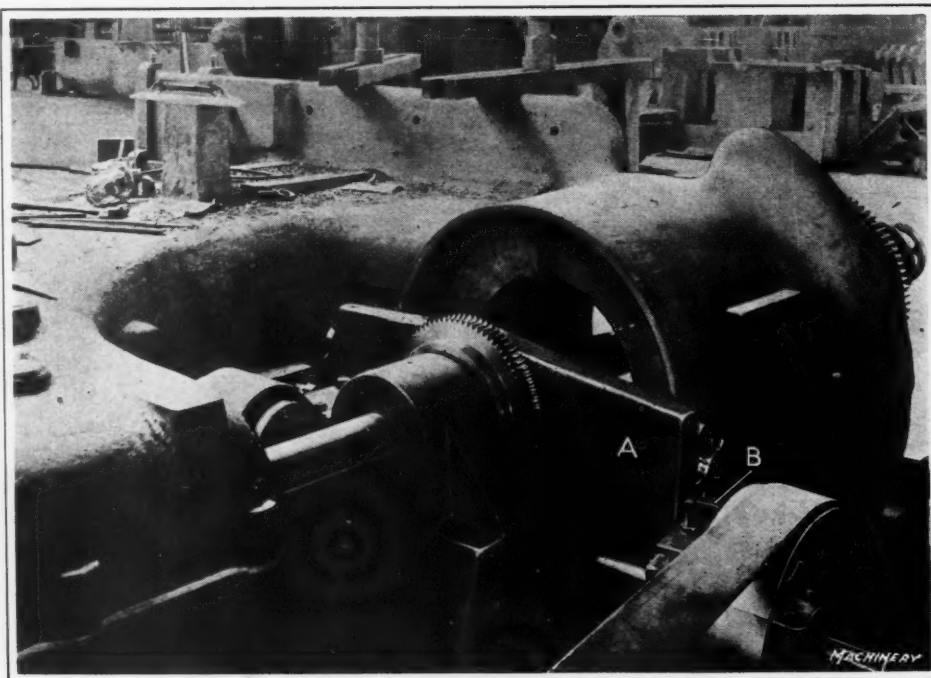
Star-wheel Feed Mechanism set up for facing Seat on Frame Casting
